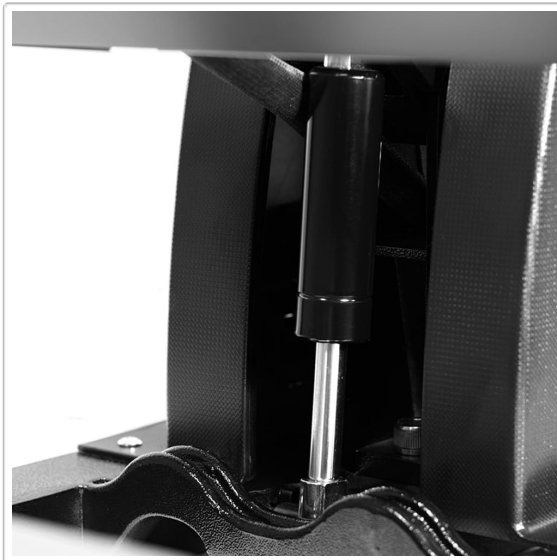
View of the Gas Shock Opening Mechanism. The gas shock assists in the smooth and controlled opening of the upper platen, reducing effort and improving safety.
